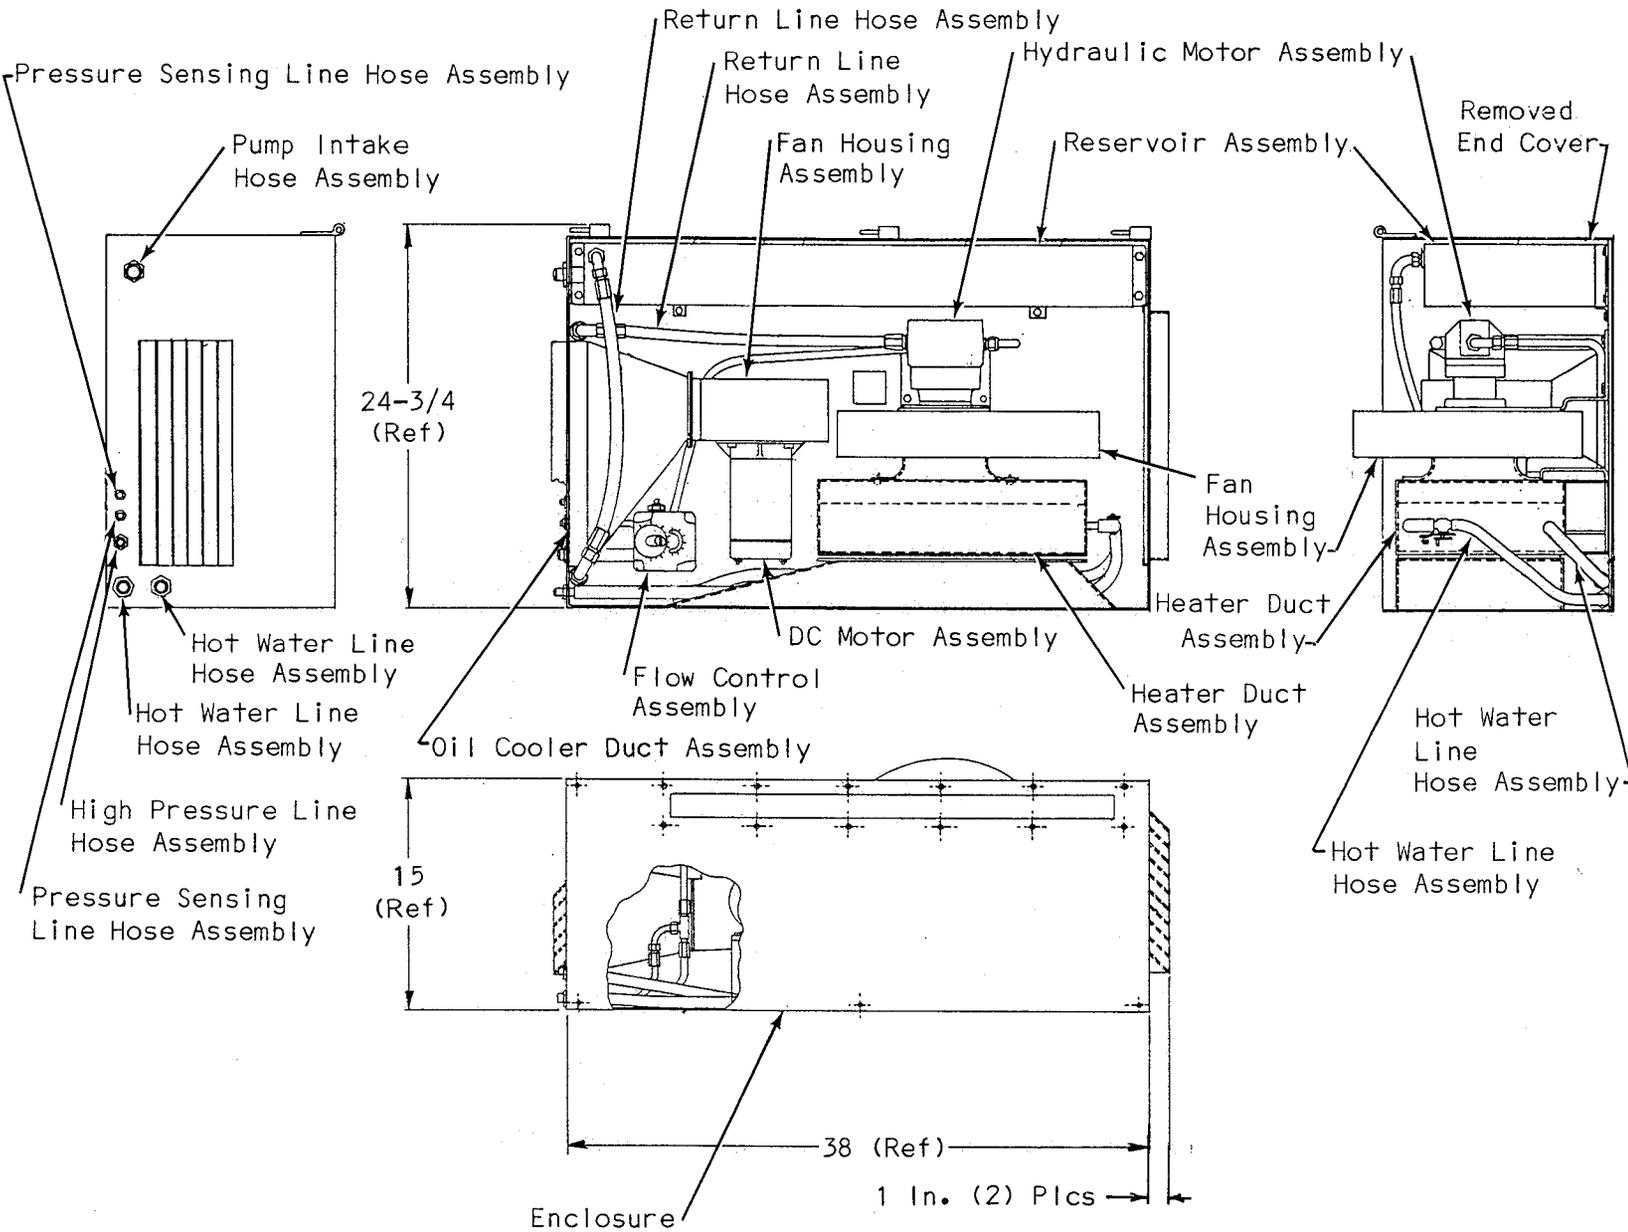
Heat Only, Partially Enclosed Cab Hydraulic Drive Circuit
